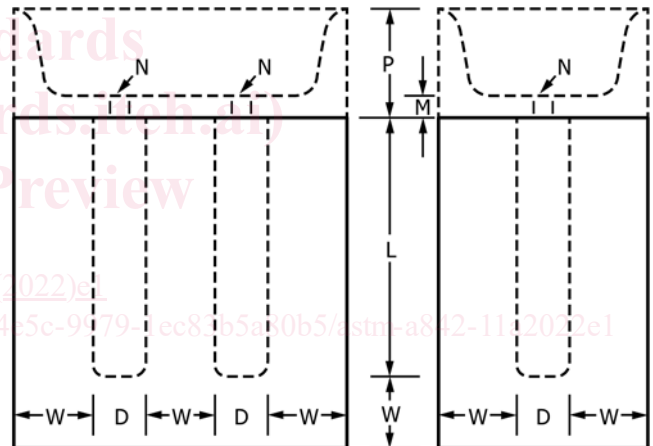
Design and Dimensions for Mold for Separately Cast Cylindrical Test Bars
